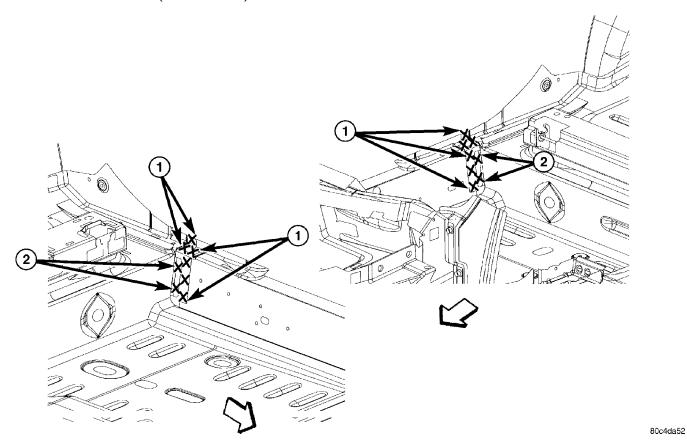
REAR FLOOR PAN TO INNER BODY SIDE SILL
